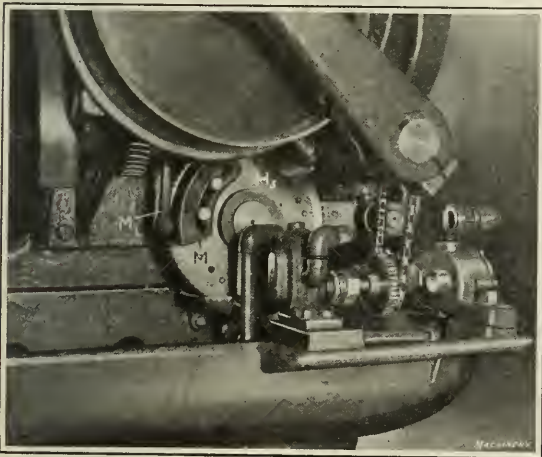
Cam Position for operating Clutch for Right-hand Threading
